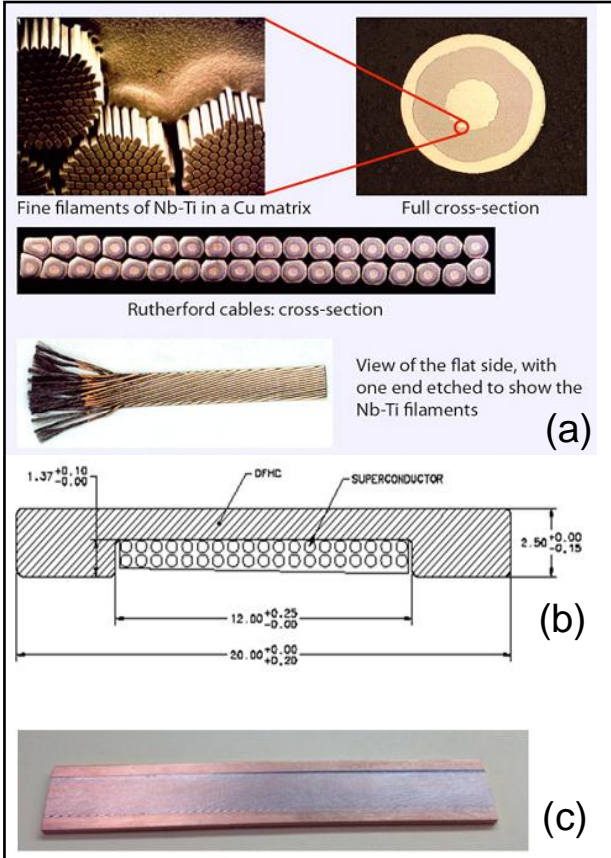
(a) SSC outer cable, (b) conductor dimension for torus coil, (c) Soldered SSC cable in copper channel – torus conductor as manufactured.
